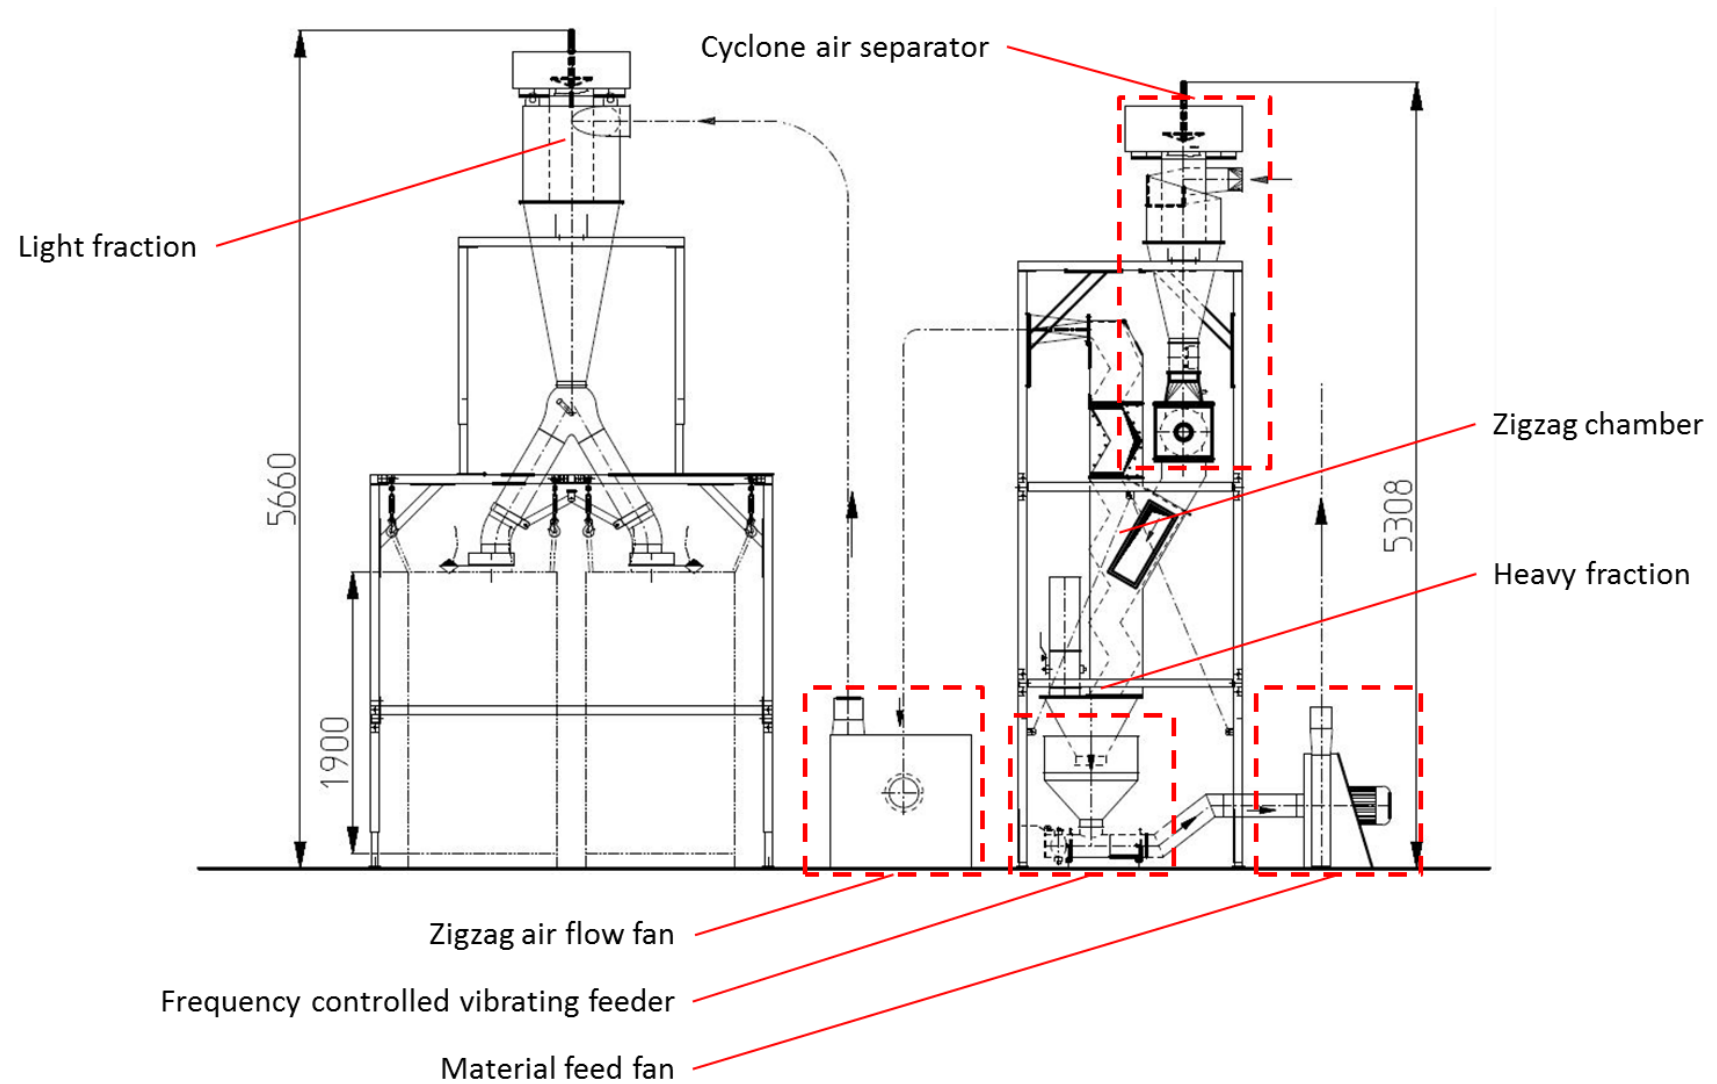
Herbold® SZS 630/212 engineering drawing
